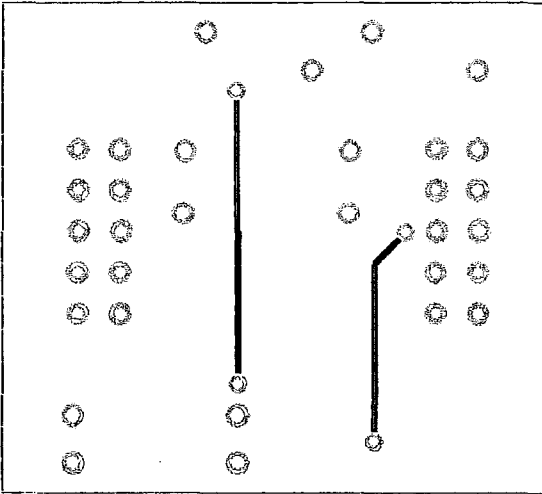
AVRISP PCB Layout (Bottom Layer)
